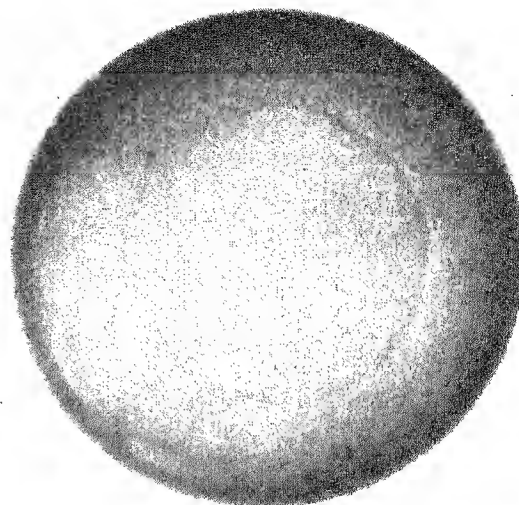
Radiograph by radium of a disc of extruded copper and brass.
